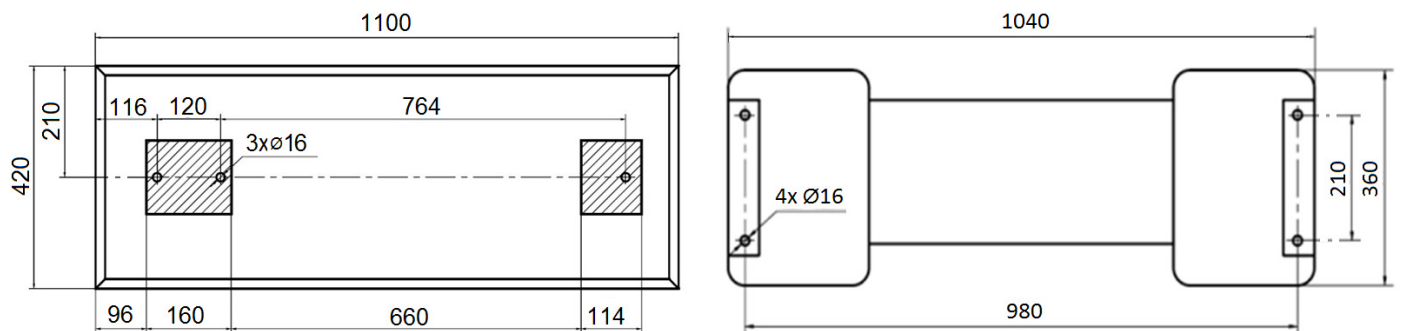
Anchor bolt pattern for lathe bed (left) & machine stand (right)
